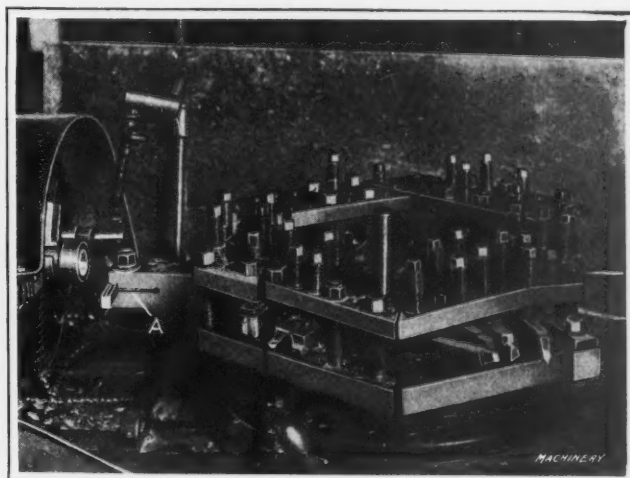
Machining the Gear End of a Main Drive Shaft Gear on a Turret Lathe
